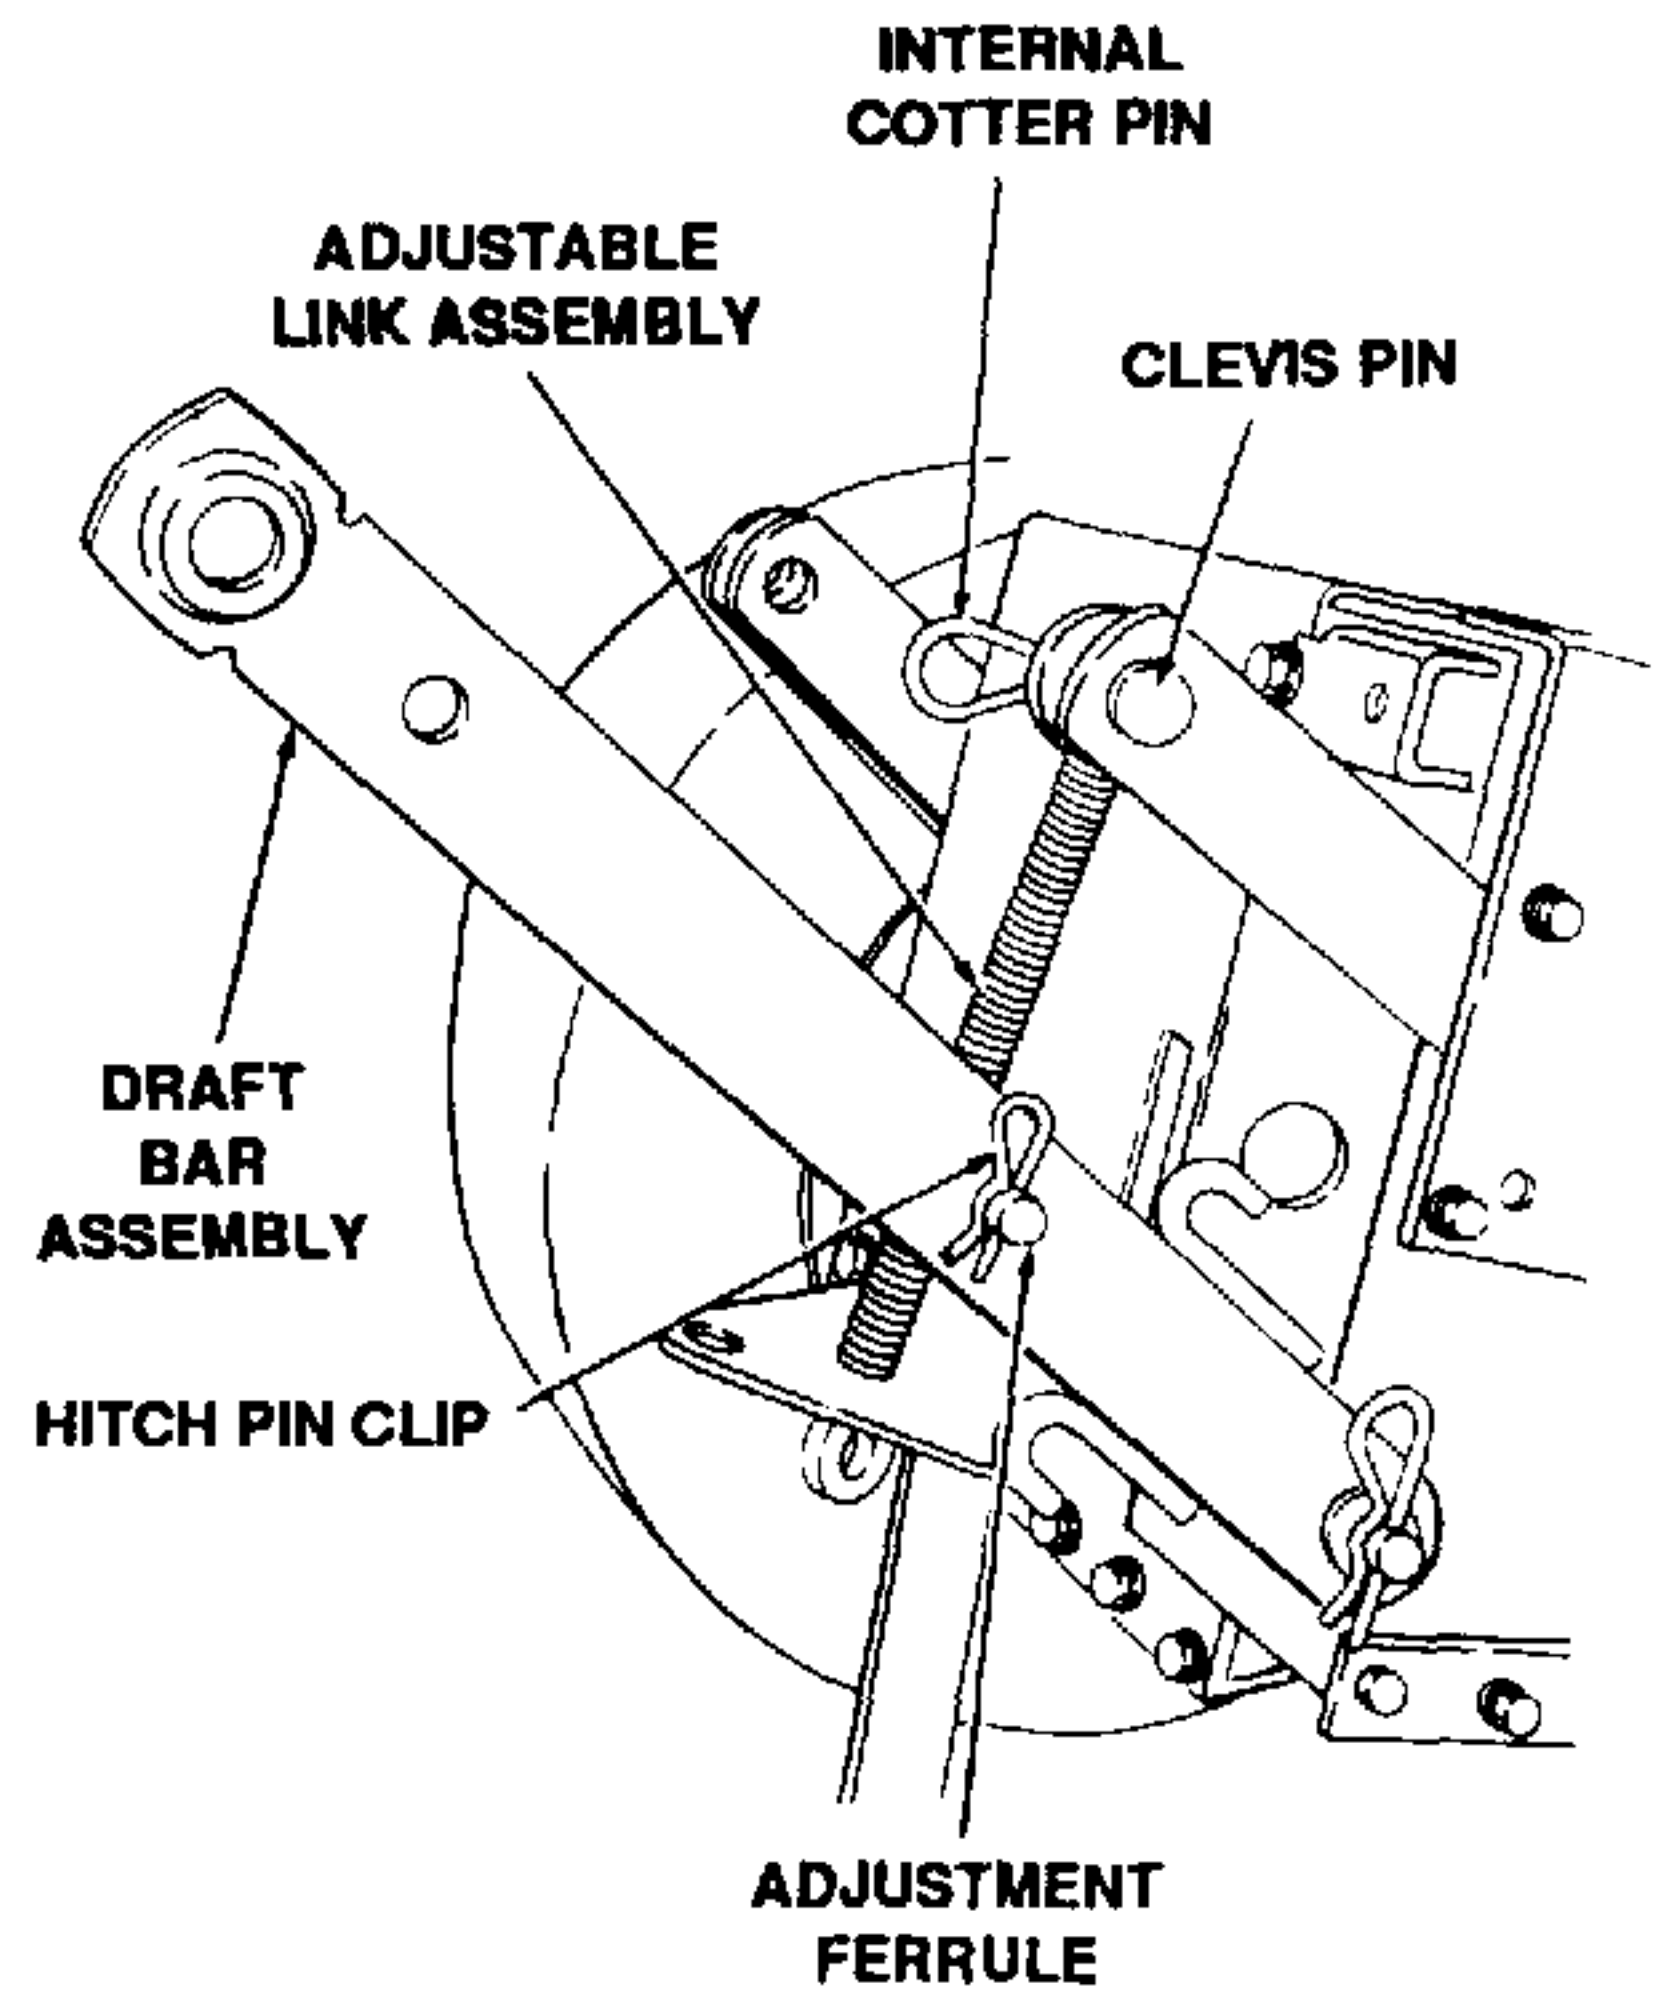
Securing Adjustable Link Assembly to Draft Bar Assembly.
